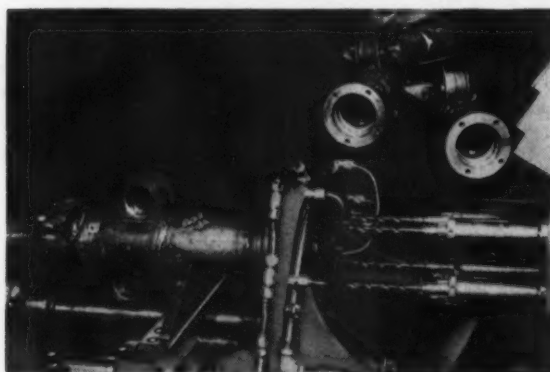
Multiple drilling setup using 4 step drills for producing countersunk holes in axle flanges.
